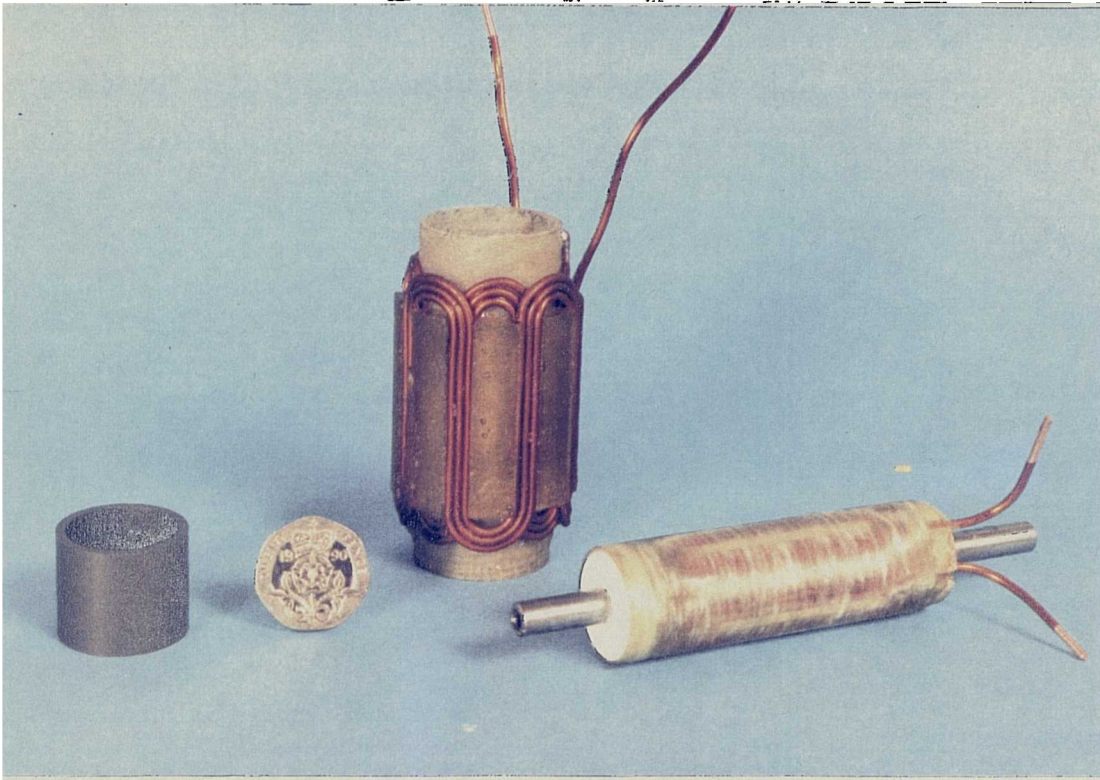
Multipole serpentine magnetizing fixture prior to resin encapsulation.
